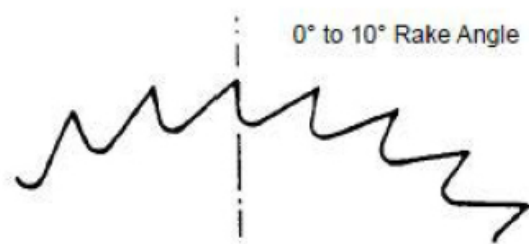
Typical saw Blade for Cutting AVONITE Flex Sheet
